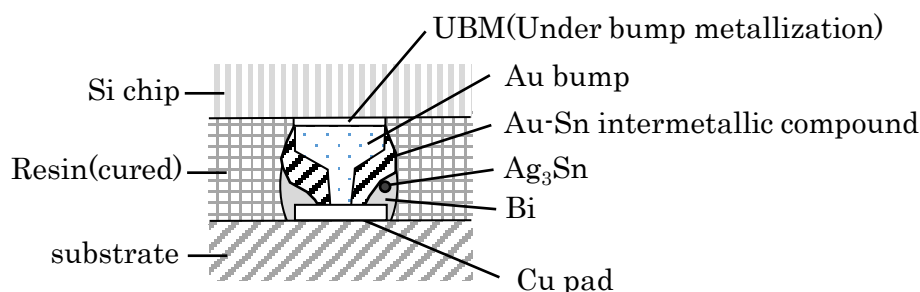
Schematic view of Au bump joint using Sn-57Bi-1Ag solder with higher melting point than that of initial solder.
